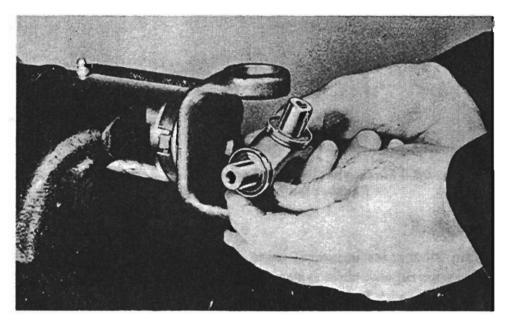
After Removing Round Type Bearing Retainers, Lift Out the Journal Cross as Shown.
